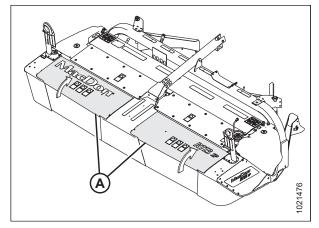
Cutterbar Doors – R113 SP Shown, R116 SP Similar
